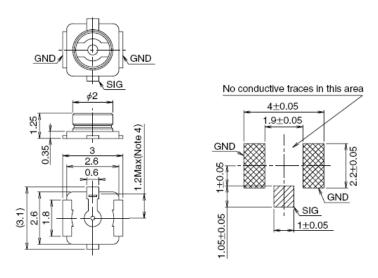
Dimensions of the U.FL-R-SMT Connector (Unit: mm)
